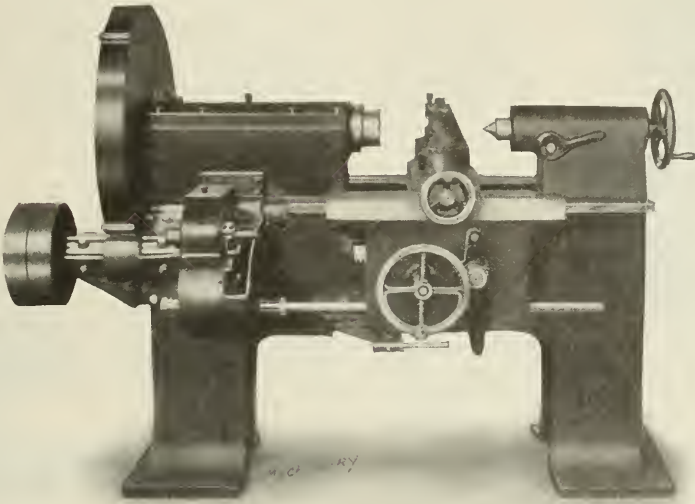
Lathe for machining 3-inch Shells, built by Pottstown Machine Co.
